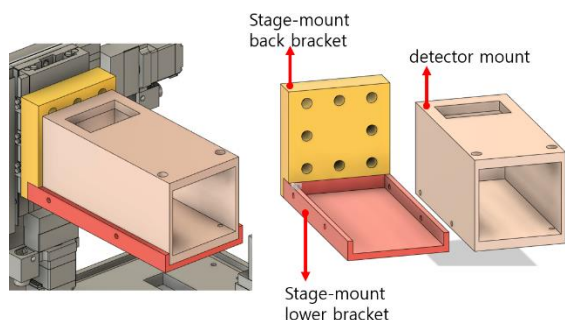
Assembly of the detector mount and the stage-mount brackets.
